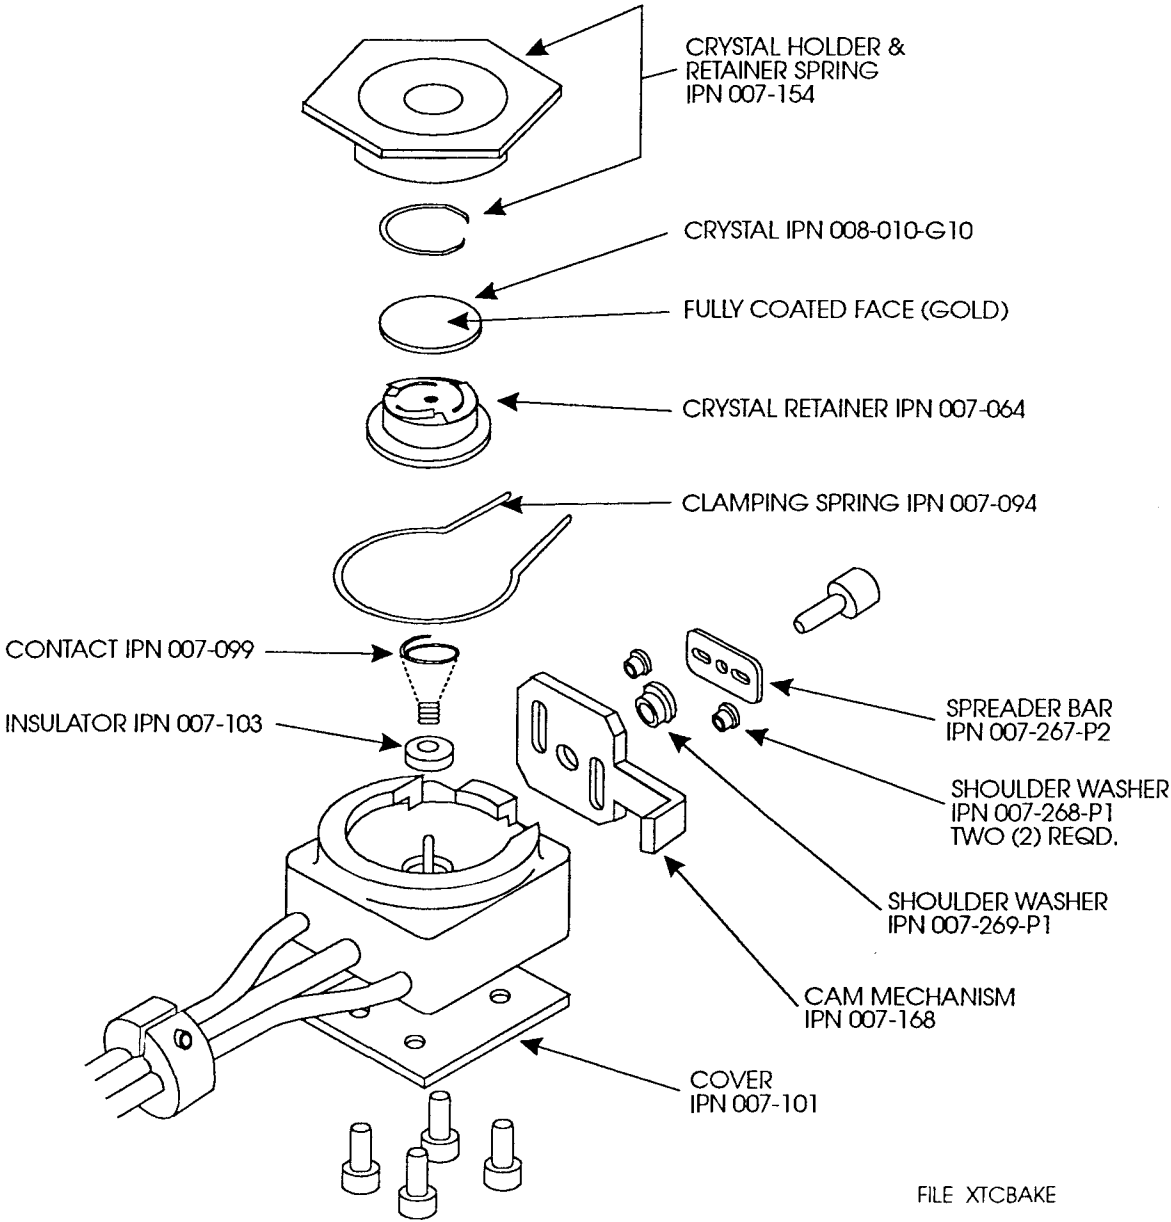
Bakeable Crystal Sensor (Exploded)
